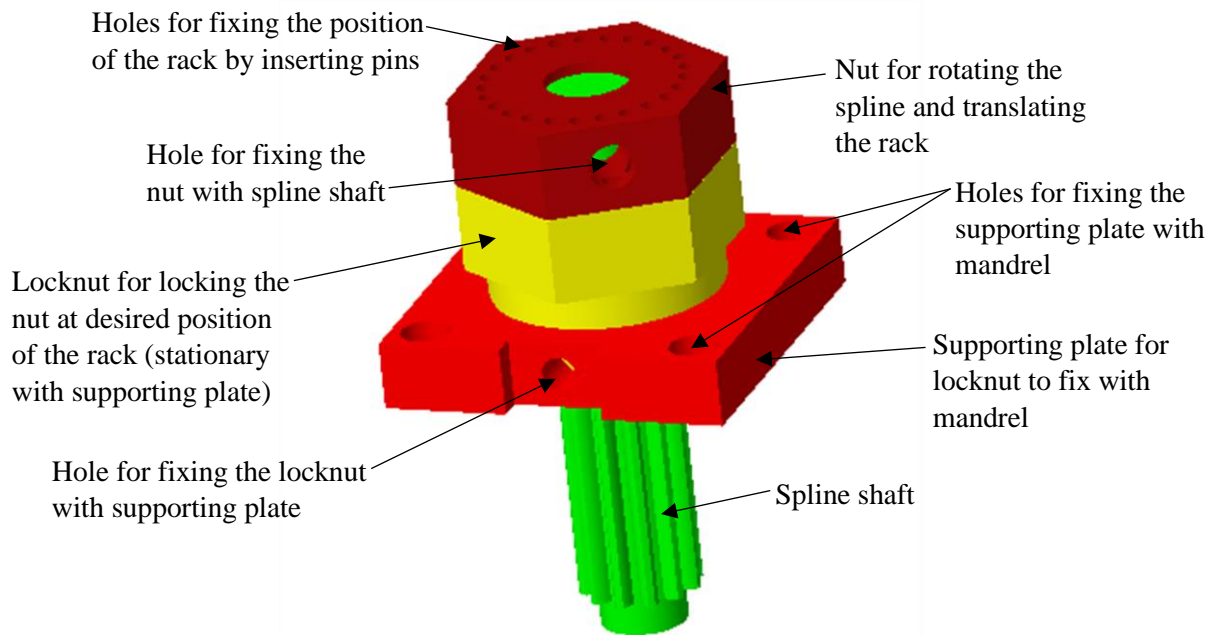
3-D CAD model of the sub-assembled nut, locknut and supporting plate of the in-situ MRH tool.
